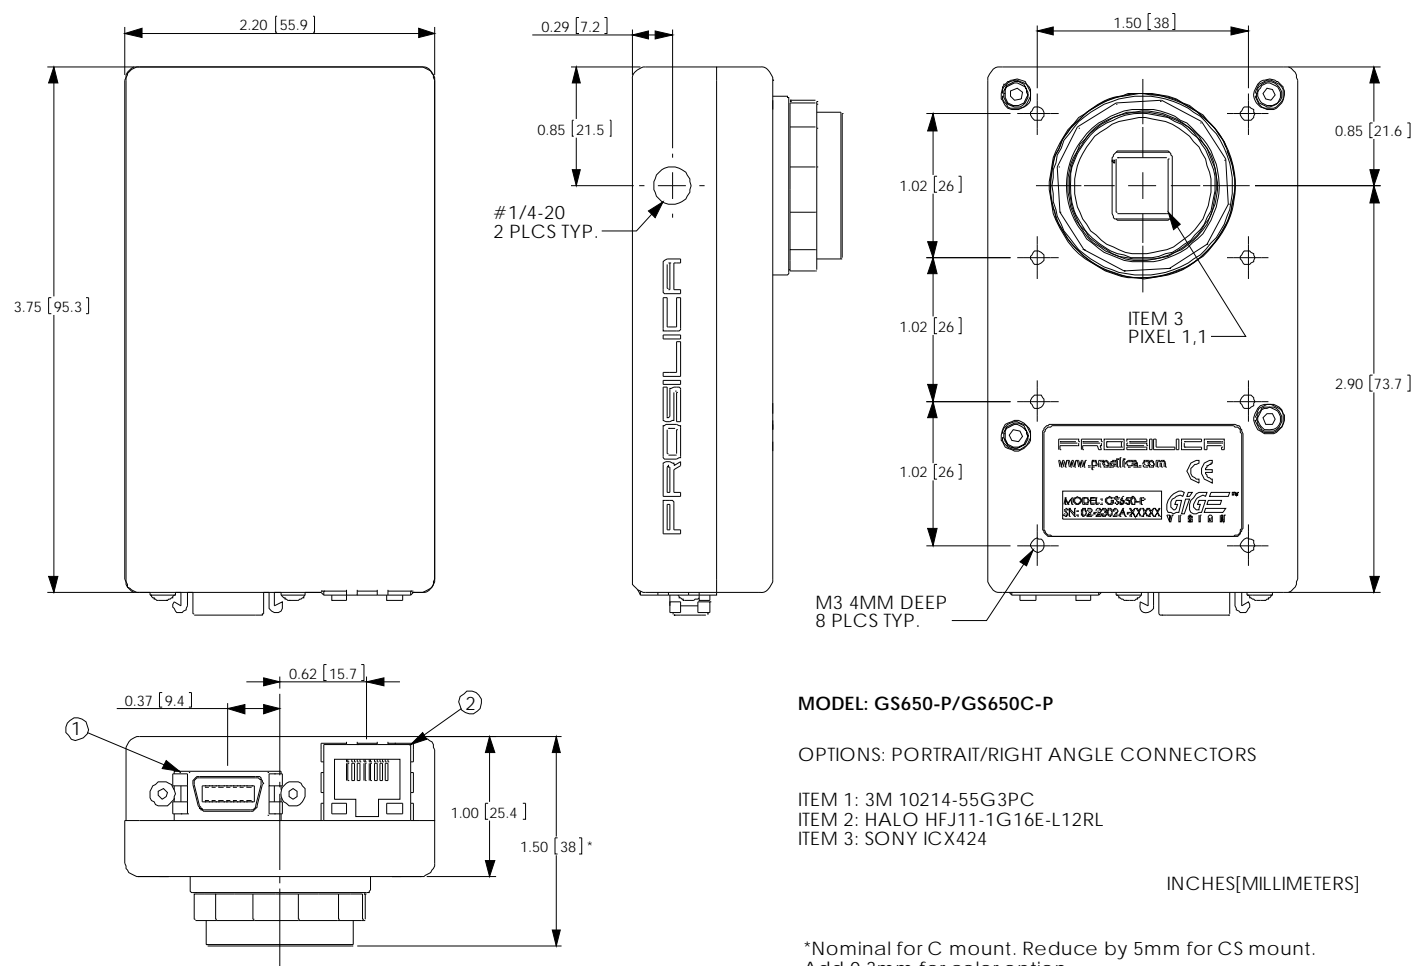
Prosilica GS650-P/GS650C-P mechanical drawing
